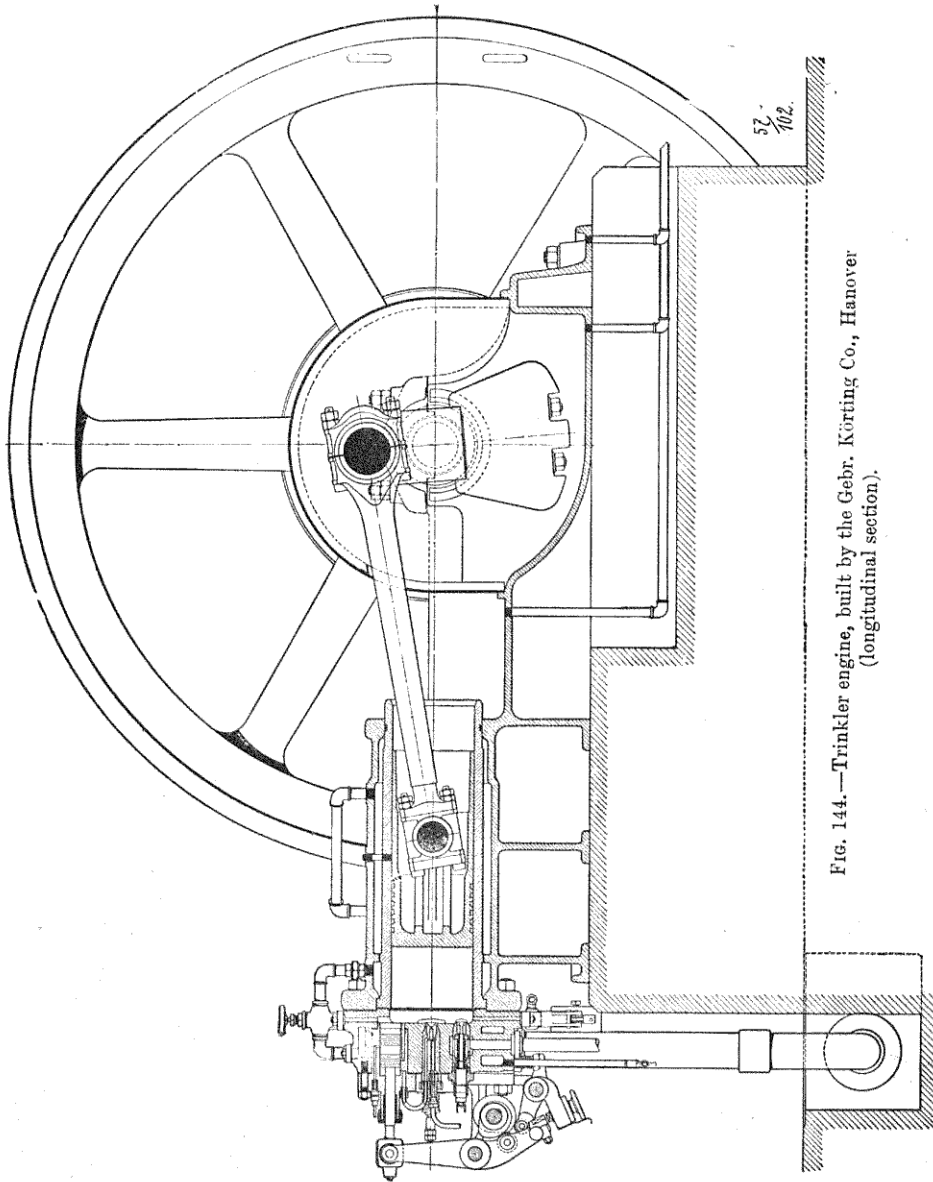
Trinkler engine, built by the Gebr. Körting Co., Hanover
